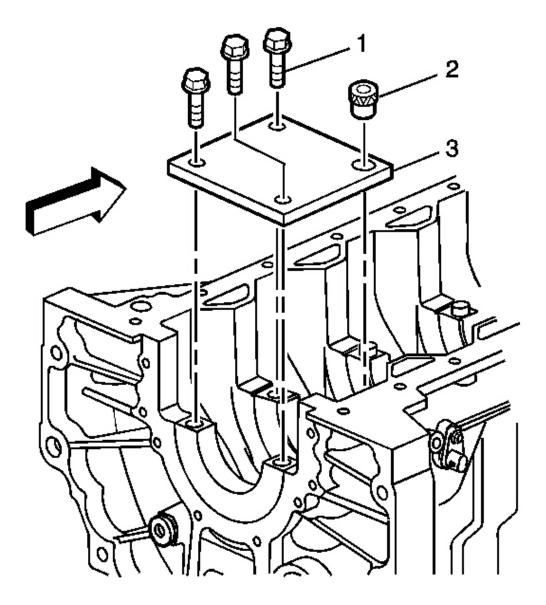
View Of Fixture Plate, Bolts & Bushing Courtesy of GENERAL MOTORS CORP.
